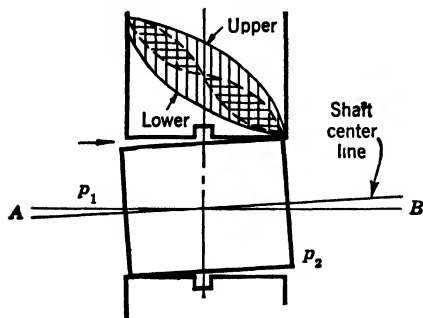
Radial forces on the balancing drum due to uneven radial clearance.
